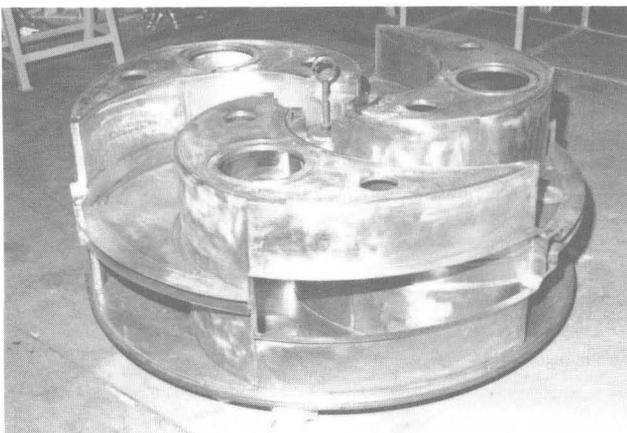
Upper parts of the liners before the welding of the cylindrical skirts.
